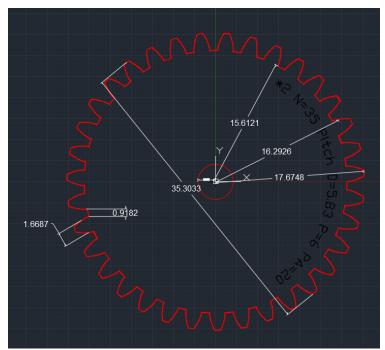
35 Toothed Gear AutoCAD Drawing, Dimensions in mm
